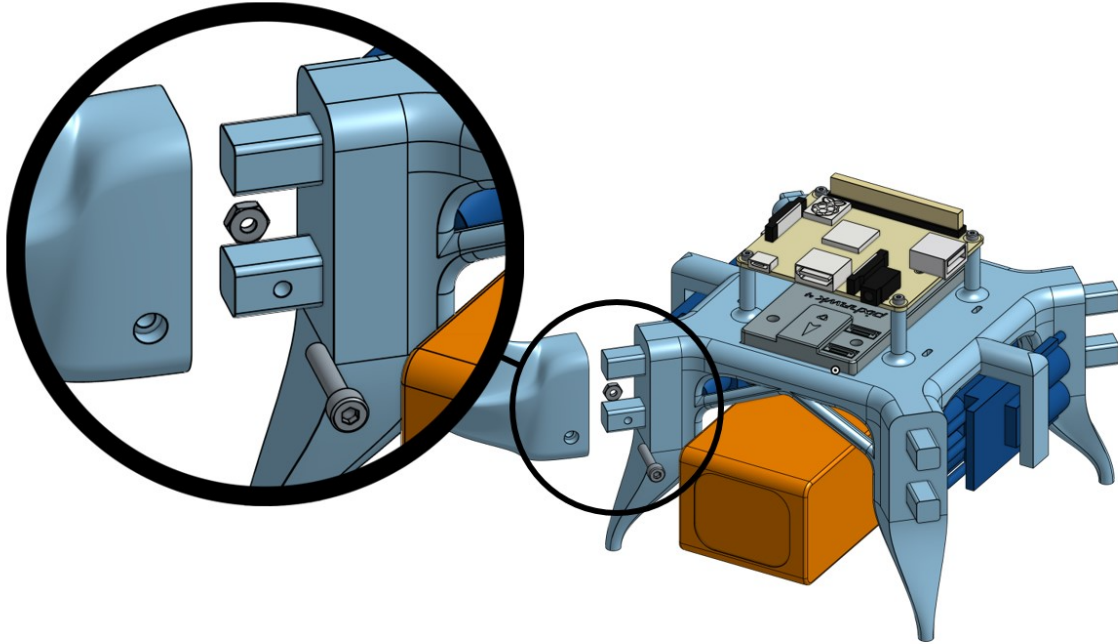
Flying test bed chassis showing exploded detail of double mortise and tenon joint for propulsor arms
